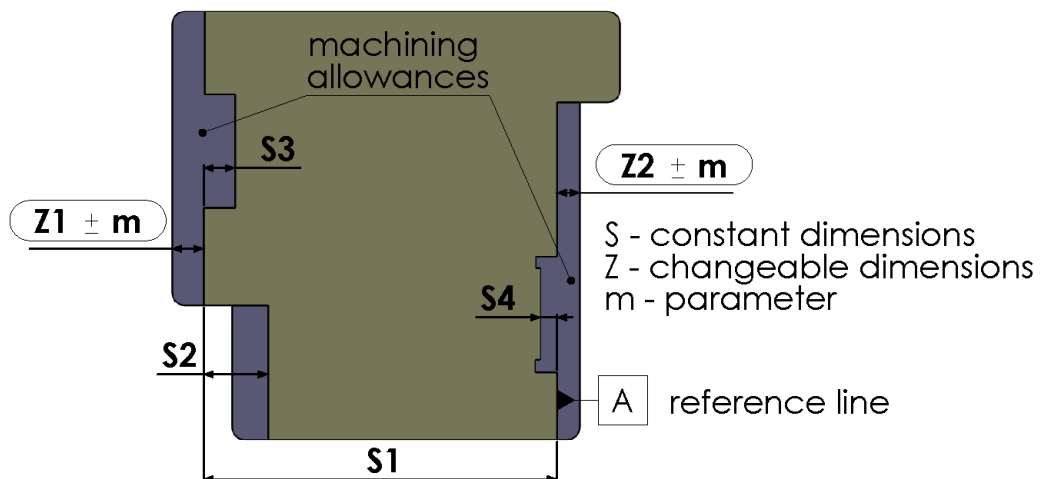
Cast cross-section (indicated: machining allowances, datum surface, as well as constant and changeable dimensions).
